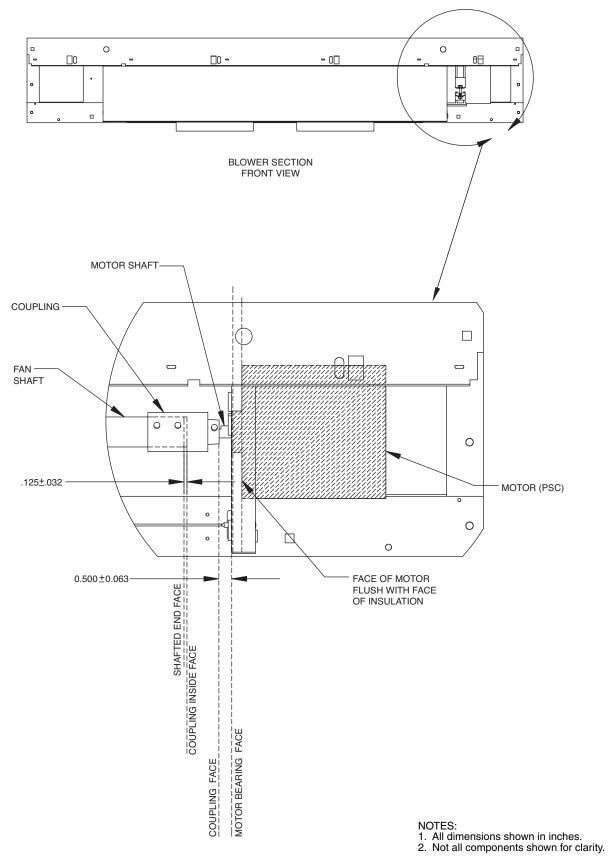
40UV,UH Ventilator Blower Section Assembly — PSC Motor Detail
